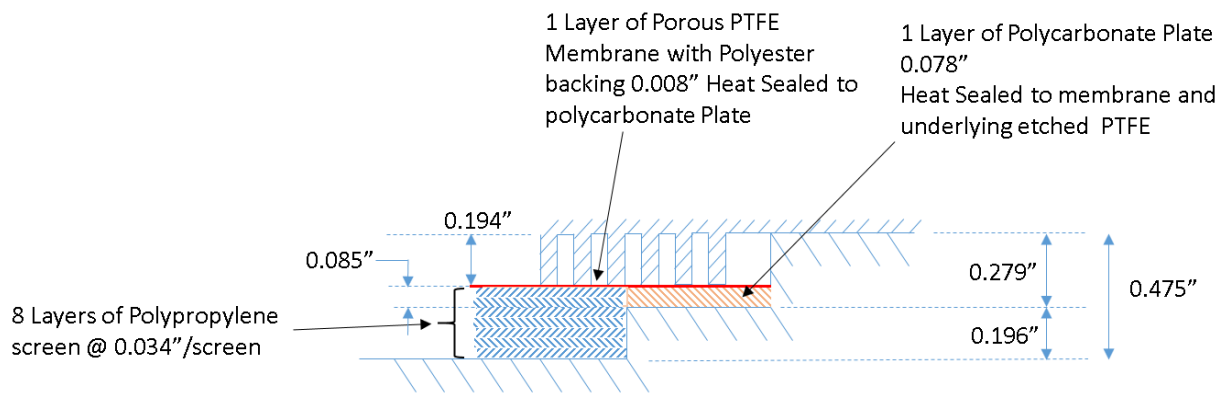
Gas/Liquid Separator Engineering Drawing.
